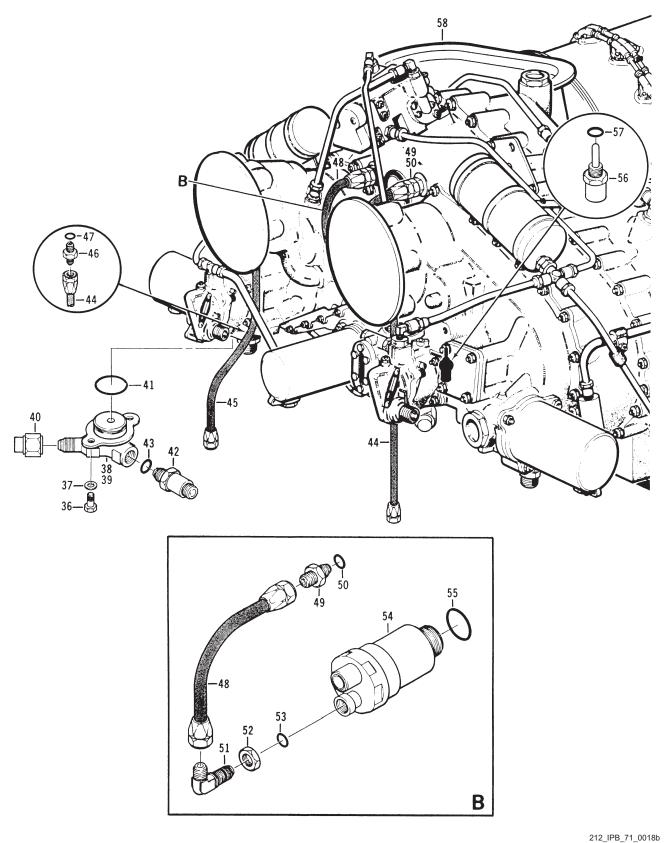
Engine Assembly, Rear (Sheet 2 of 2)
